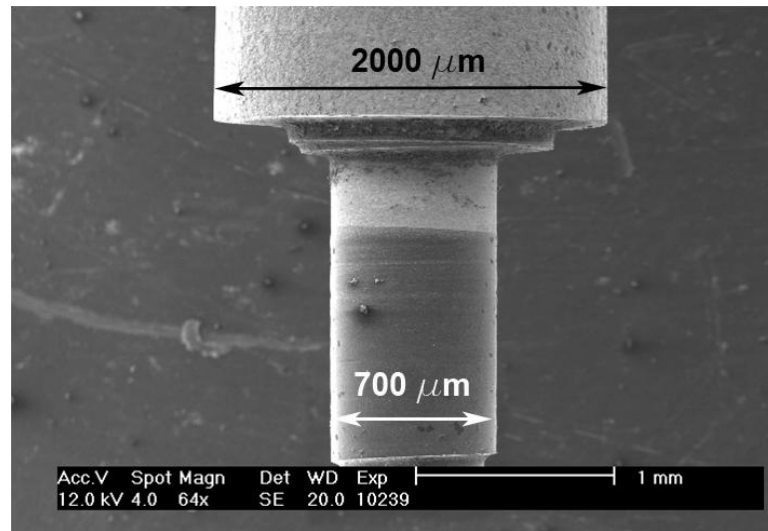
PCD micro tool made by WEDG (manufactured by Sumitomo Electric)
